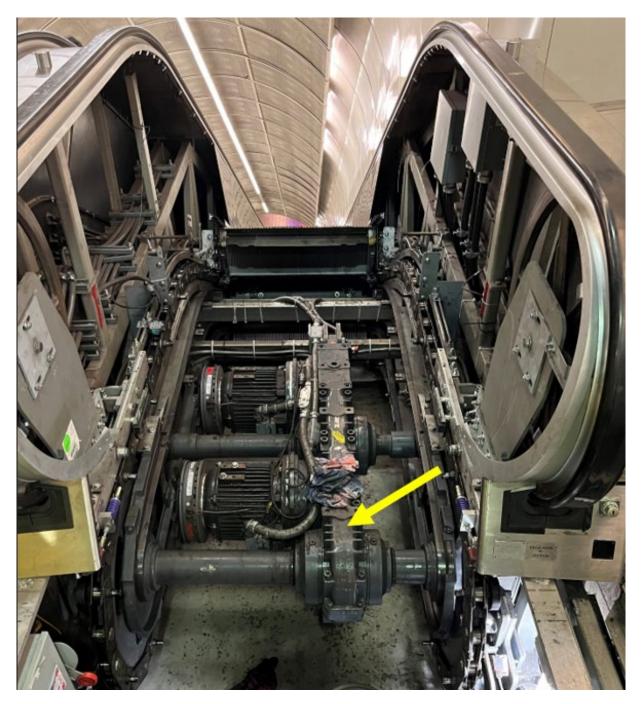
Escalator #3 drive system during disassembly. [YELLOW] Location of internal step-drive main-shaft spline failure.
